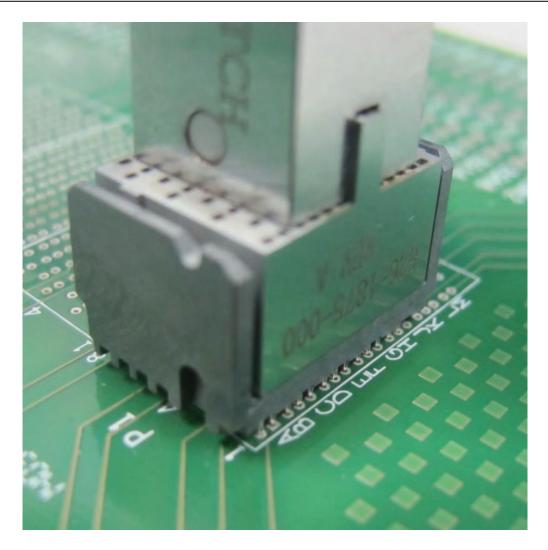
Ensure the cavities in the seating head match up to the blades on the backplane module.
